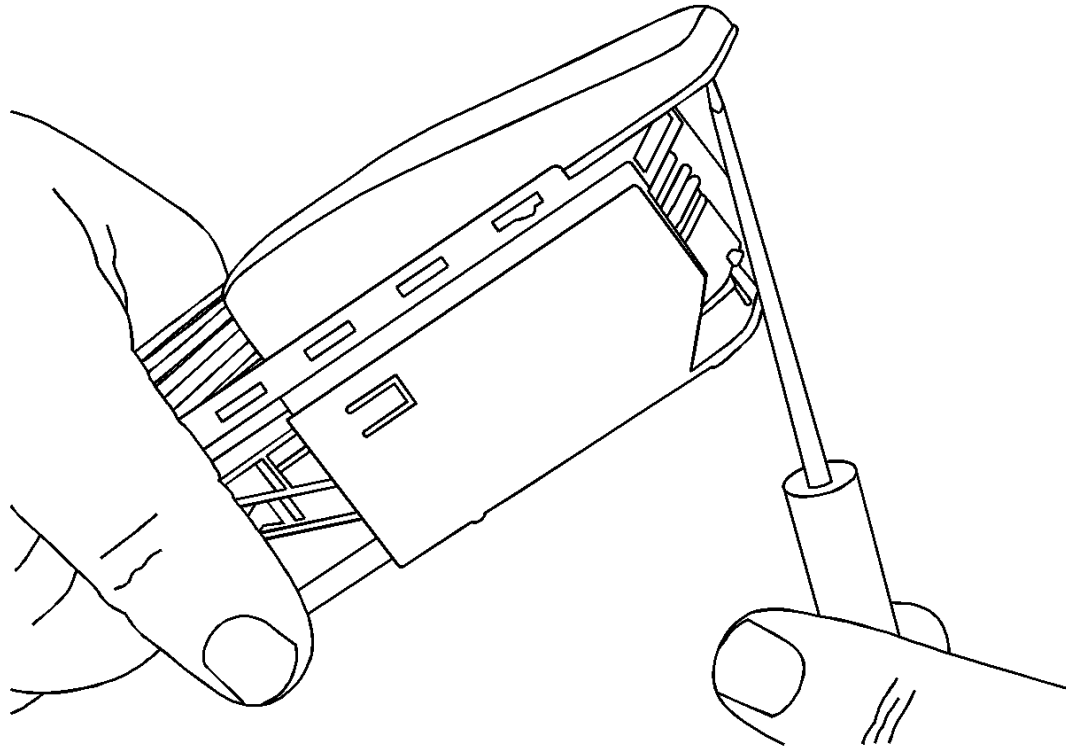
Sliding Dress Cover Forward & Off Of Kostal Connector (Glow Plug Control Module)
